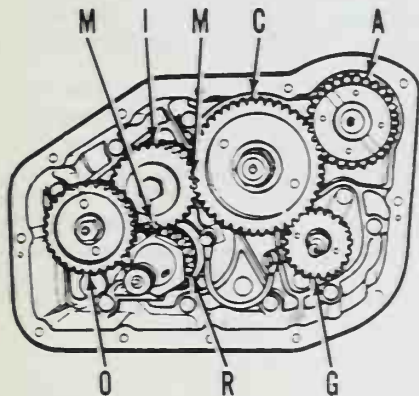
View of timing gears on Models 832, 833, L27 and L40.
